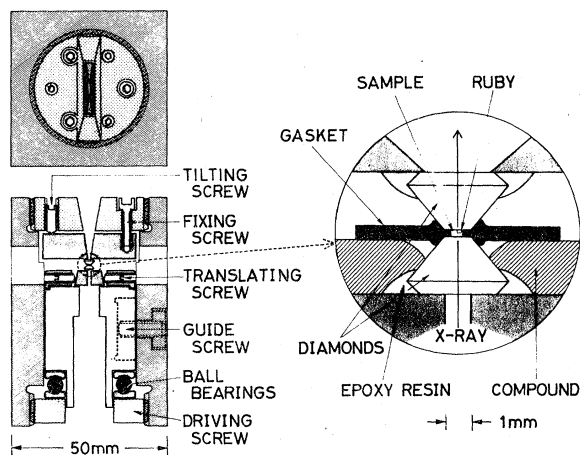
Cutaway drawing of the diamond-anvil high-pressure cell. Sample assembly is shown in the right-hand circle.
